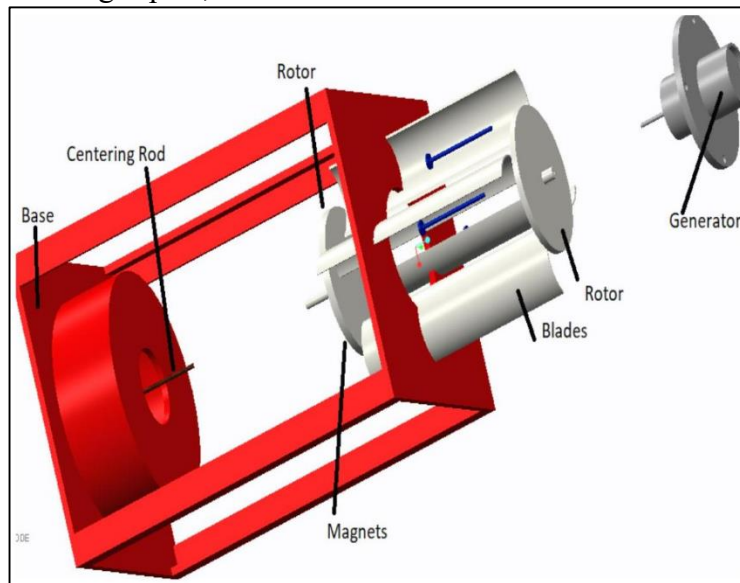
Exploded view of the components of prototype in Creo Parametric 3.0 Software
